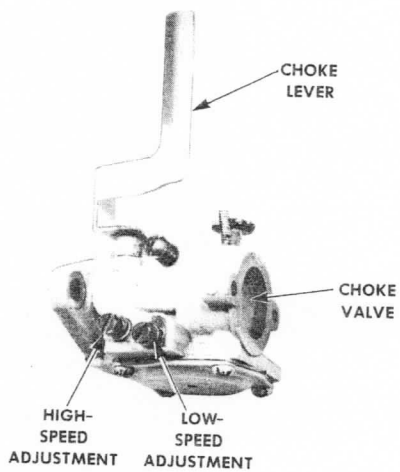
A diaphragm carburetor has a low- and a high-speed adjustment screw like other carburetors.
